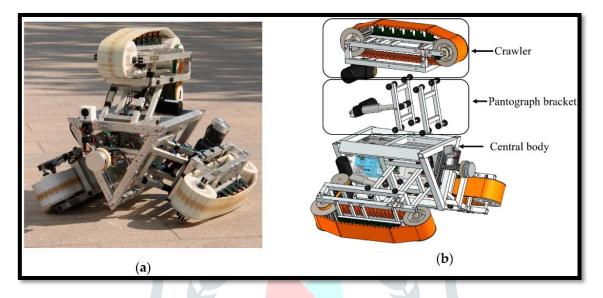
(a) Large in-pipe Robot prototype with three-wheel train, Fig(b) Solid Model
